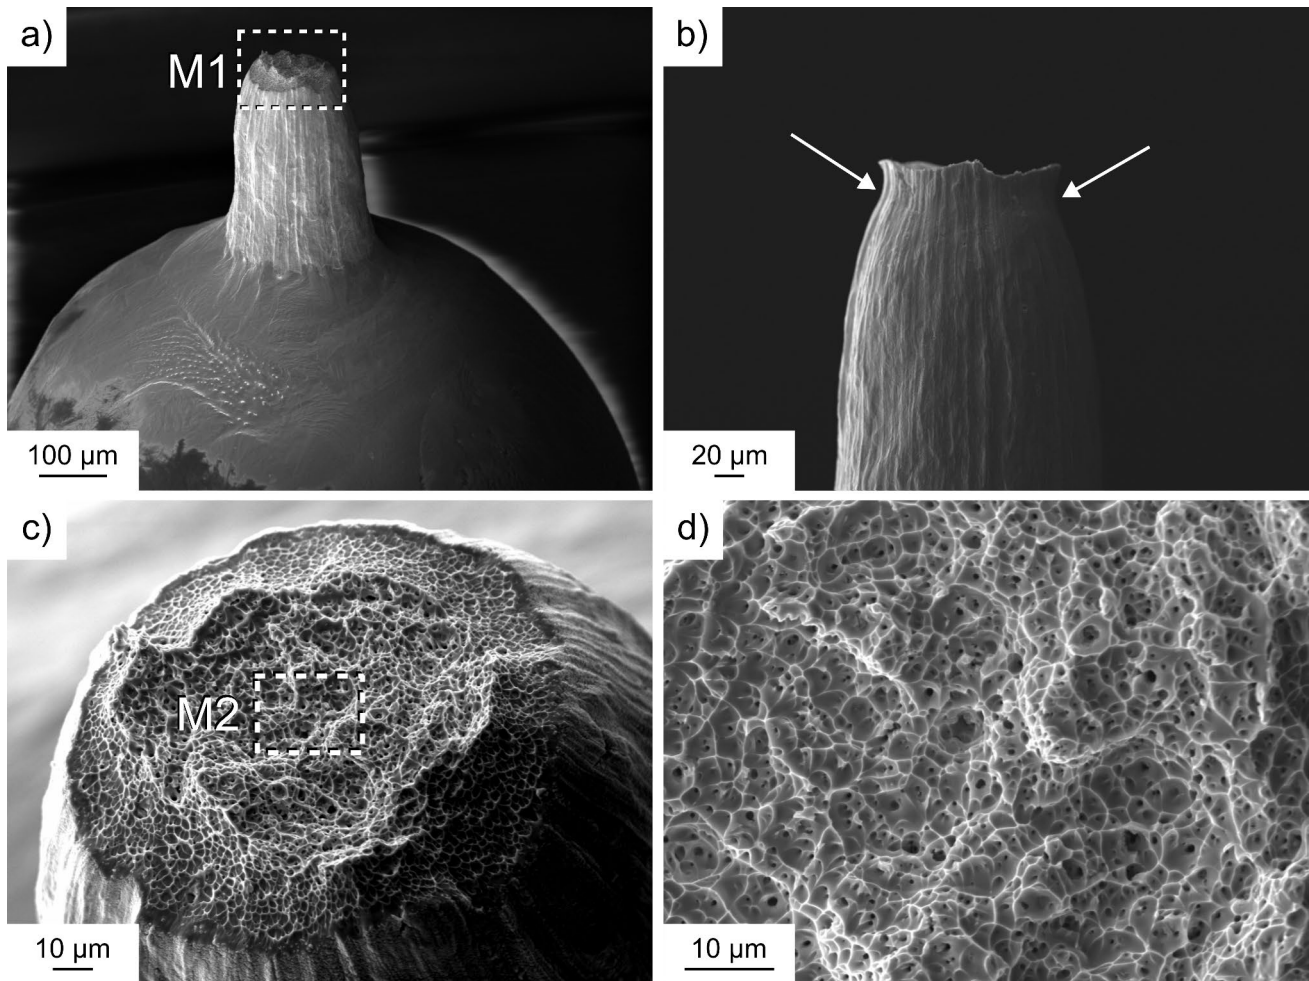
SEM images of fracture surfaces after tensile testing: a fractured wire with manufactured sphere at the bottom, b corresponding fracture surface of the wire showing necking with a cup and cone
